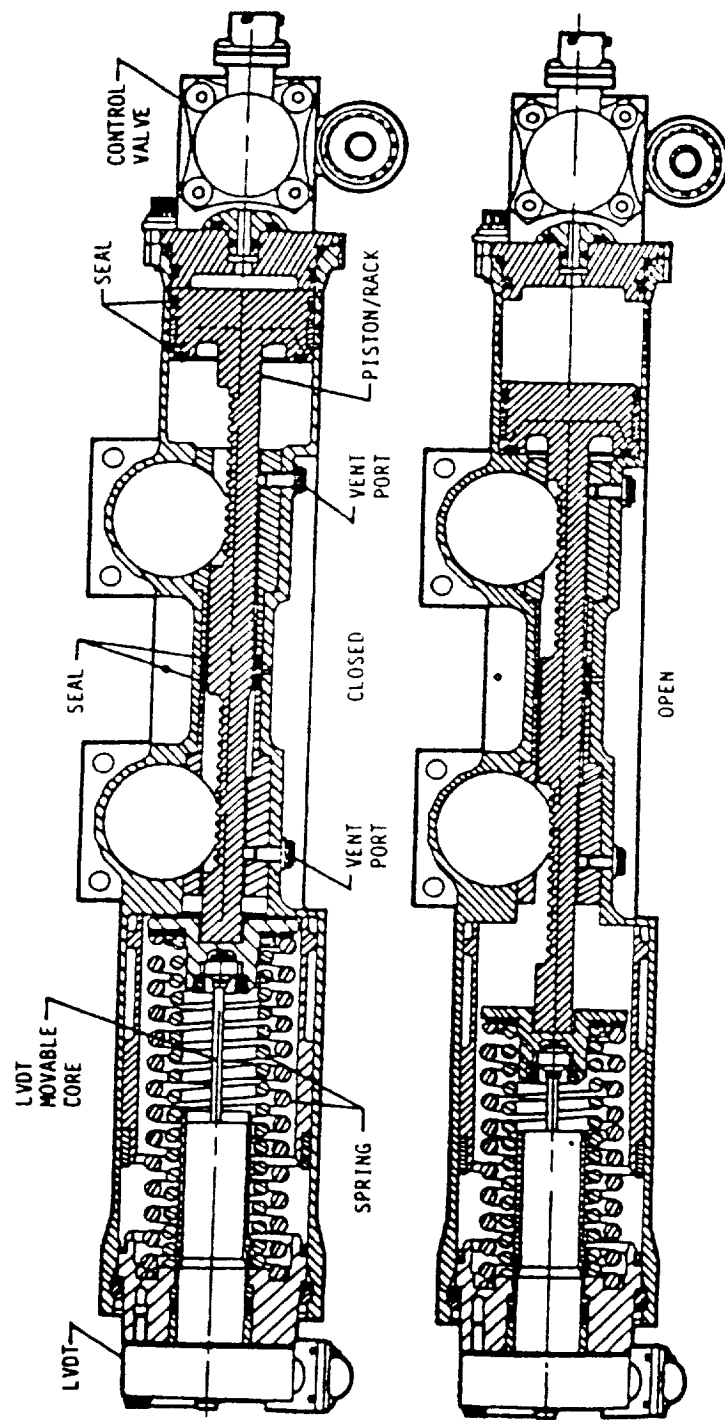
ACTUATOR ASSEMBLY CROSS SECTION
